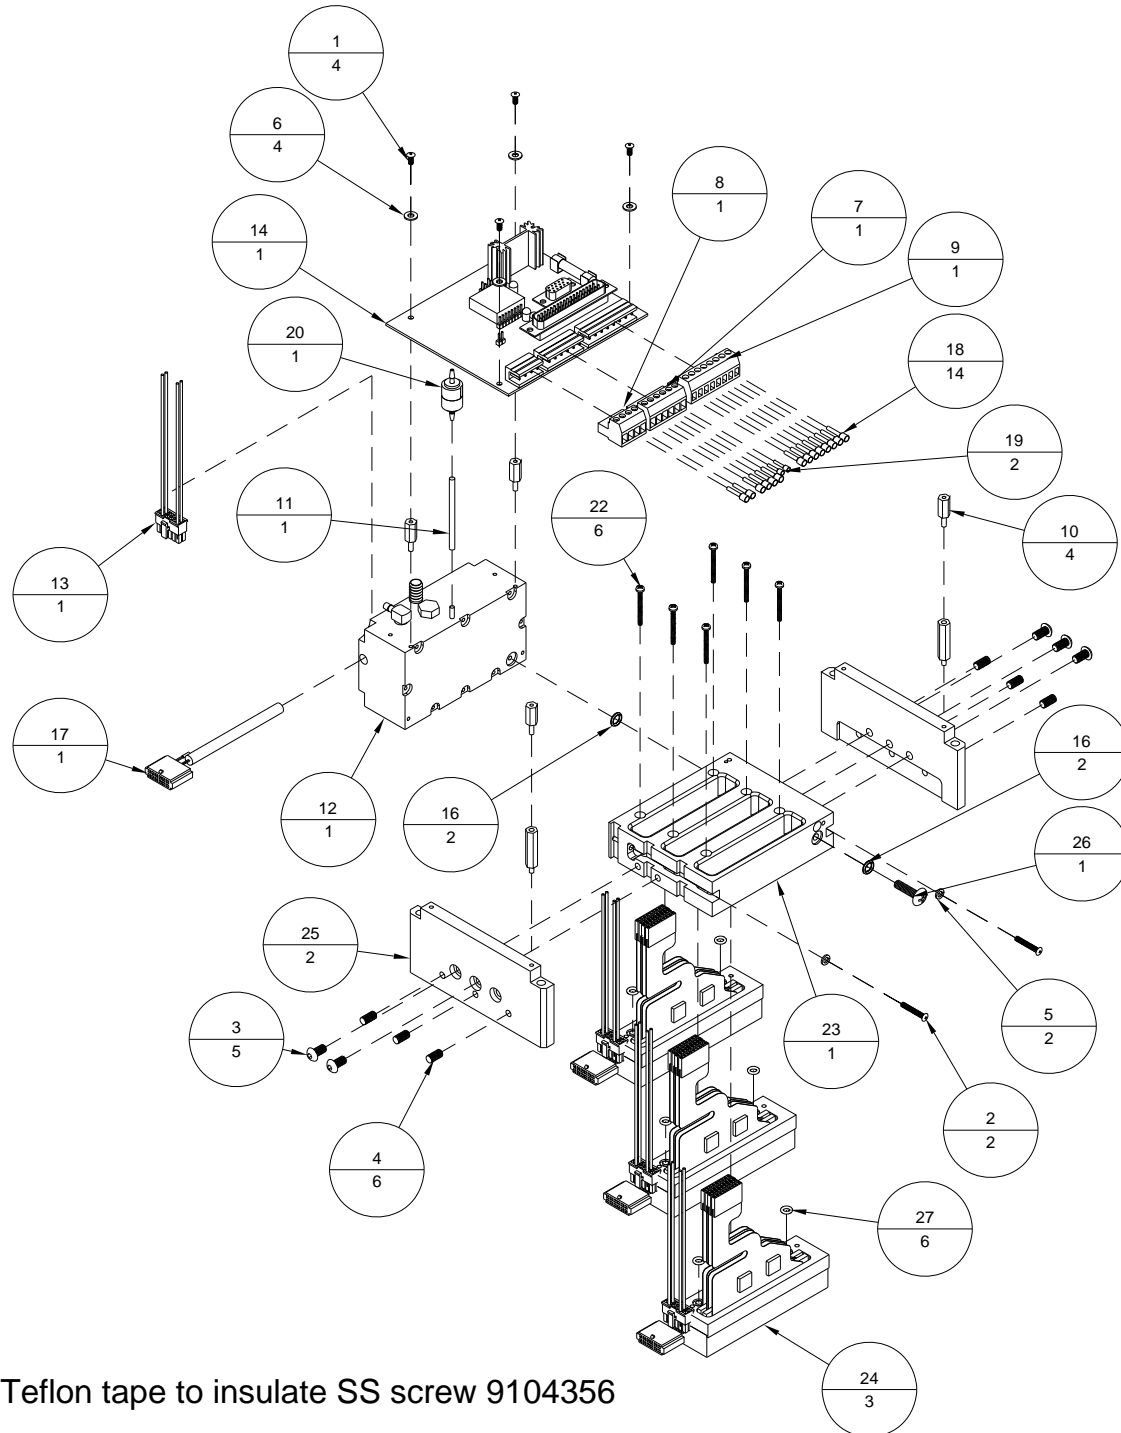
9103987A – Manifold Assembly, Adjustable 30 pL
